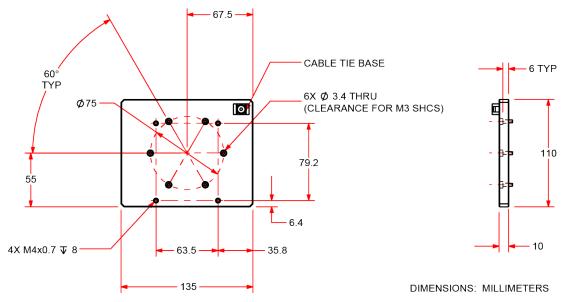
Adapter Plate Dimensions (AP-ANT95R-90G)
